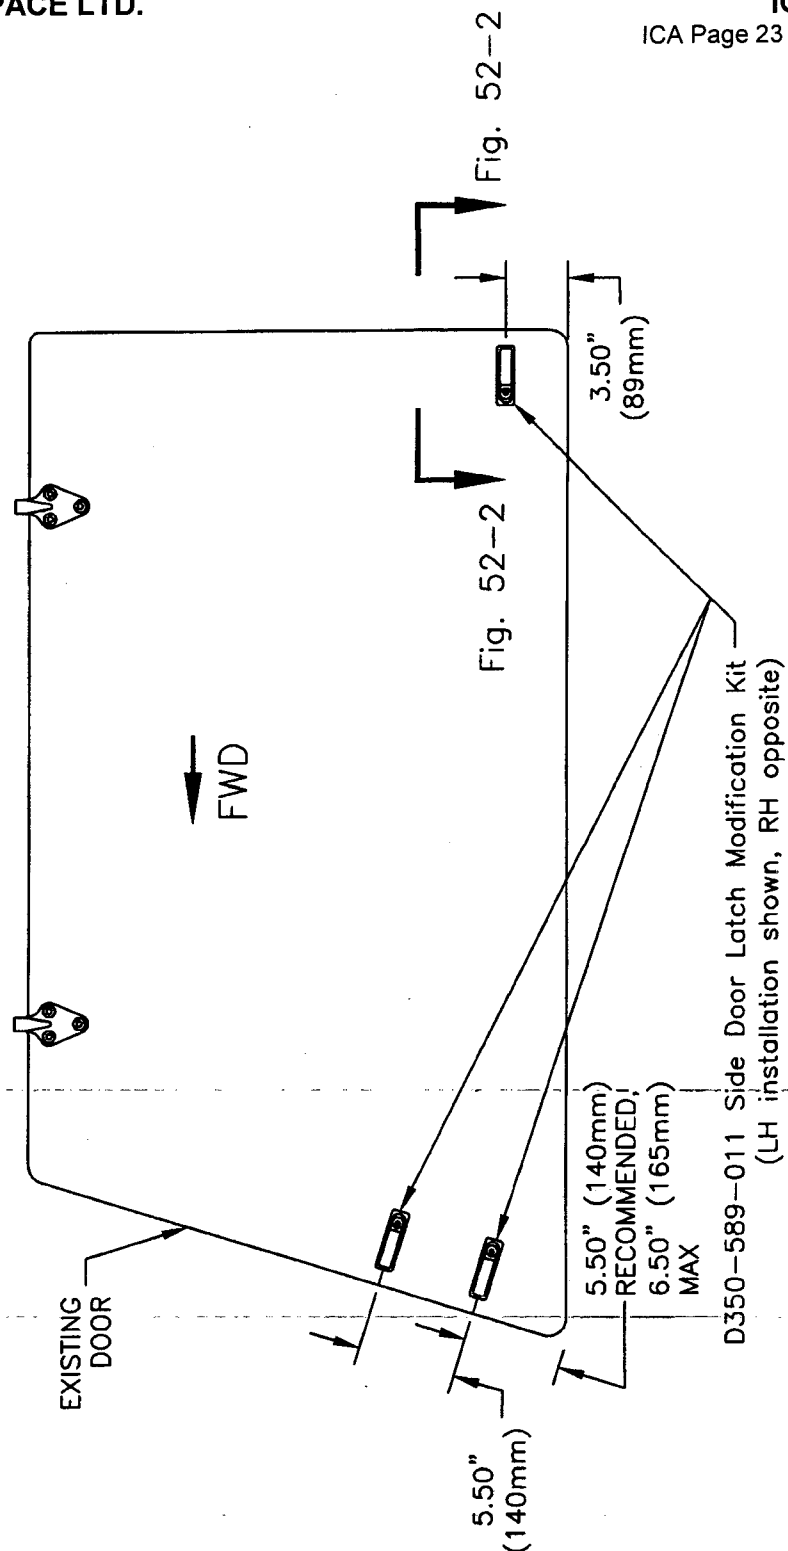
Typical D350-589-011 Side Door Latch Modification Kit
